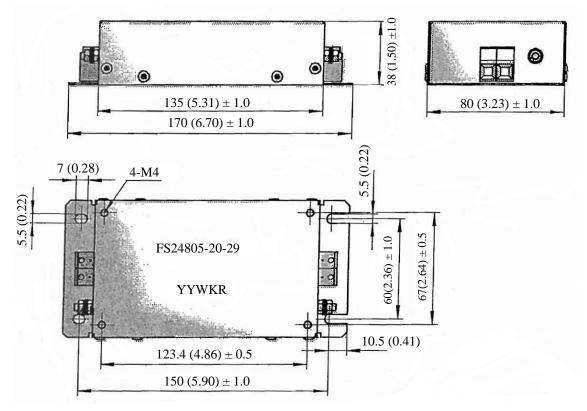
External Filter Dimensions JNFS24805-20-29
